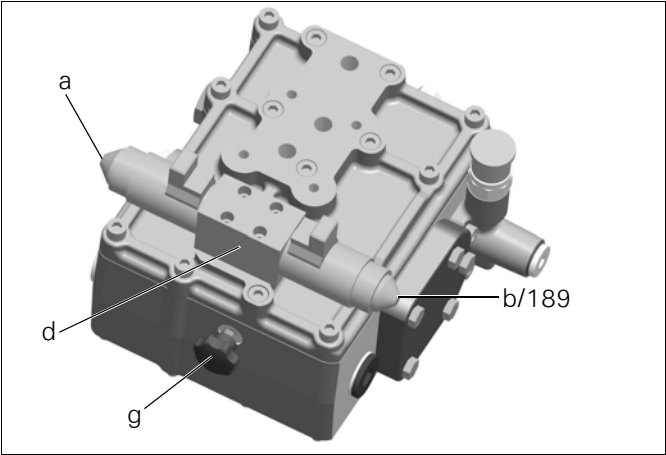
Mechanical emergency actuation of the actuation unit with electromagnets "a" and "b" (example)
